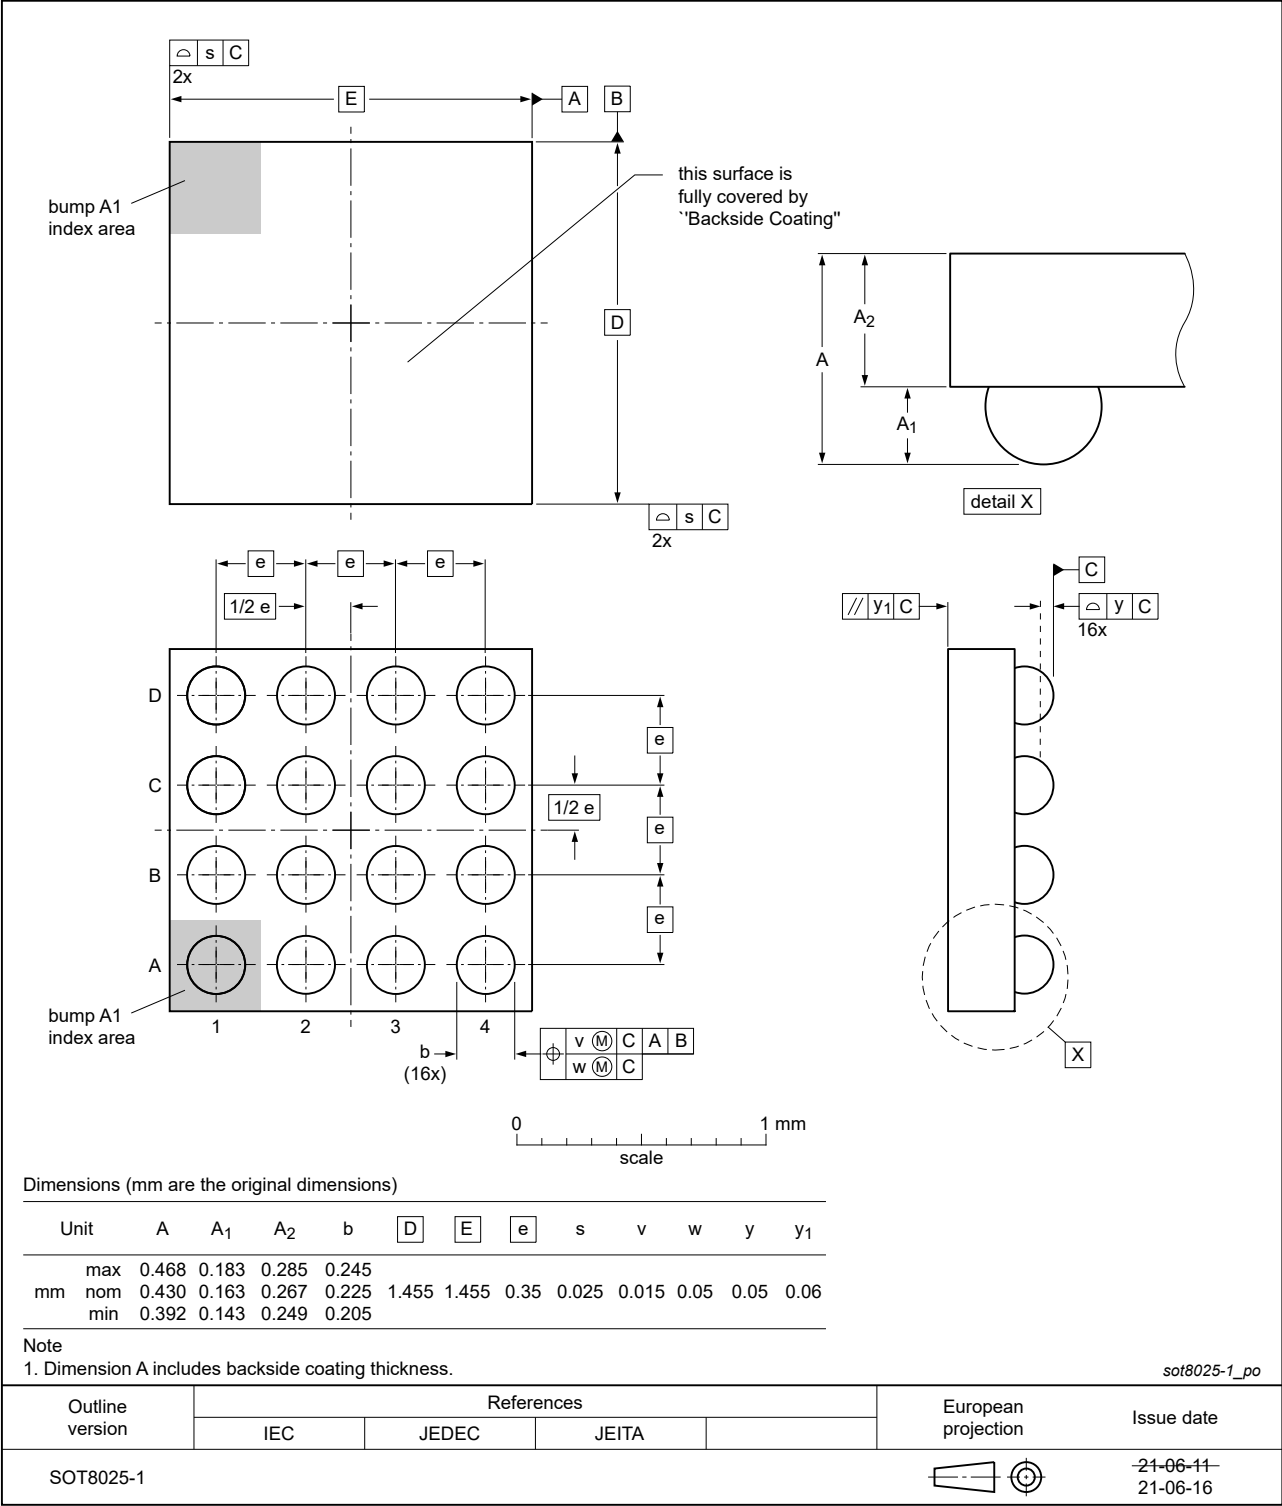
Package outline SOT8025-1 (WLCSP16)
